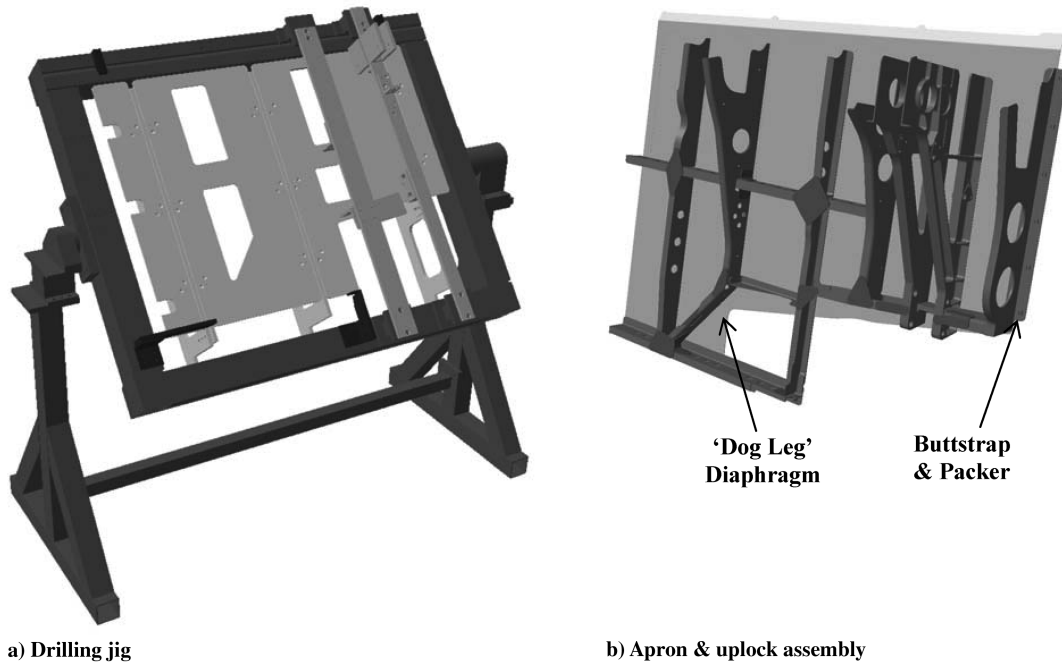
Existing jig and panel (one-piece skin) for apron and uplock assembly building.
